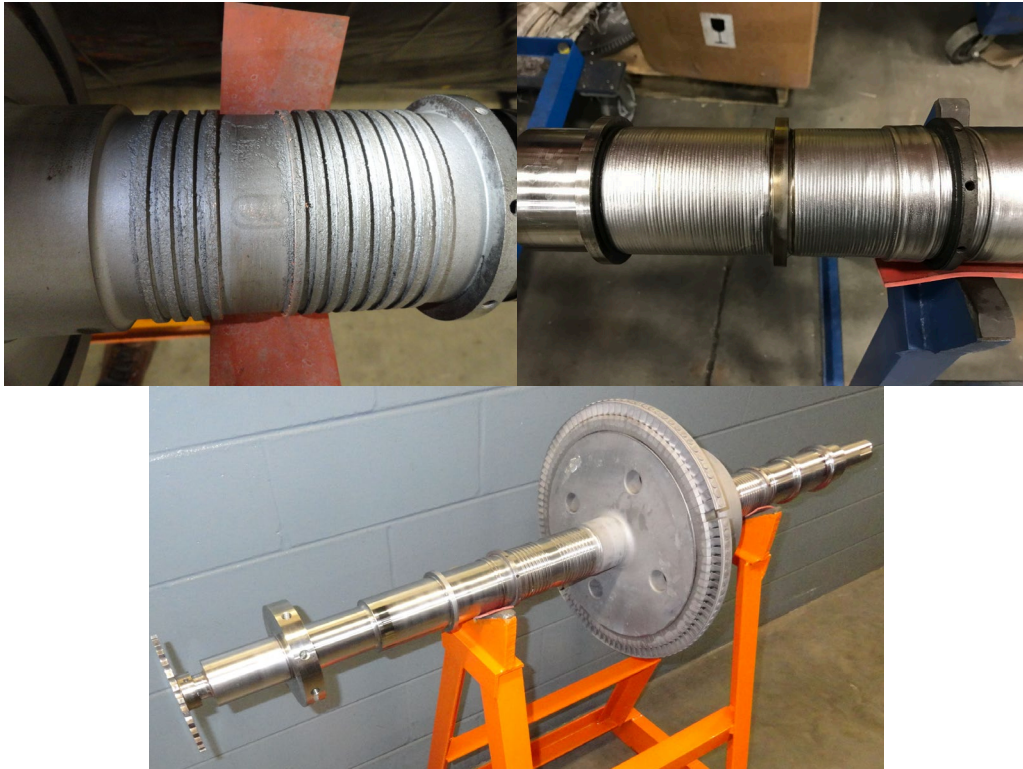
Overlay rotor restoration before repair (top left), after the weld repair (top right) and after final machining (bottom).
